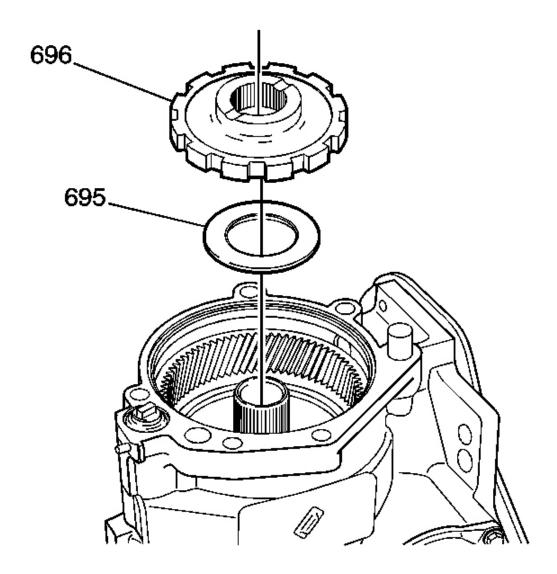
View Of Park Gear Thrust Bearing & Park Gear Courtesy of GENERAL MOTORS CORP.
